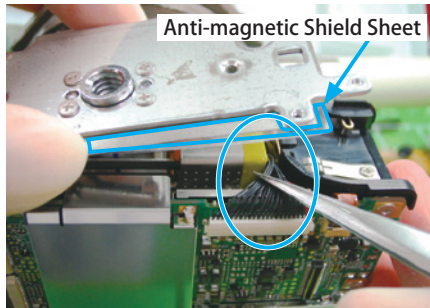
Auto Focus FPC Ass'y Assembly 5
